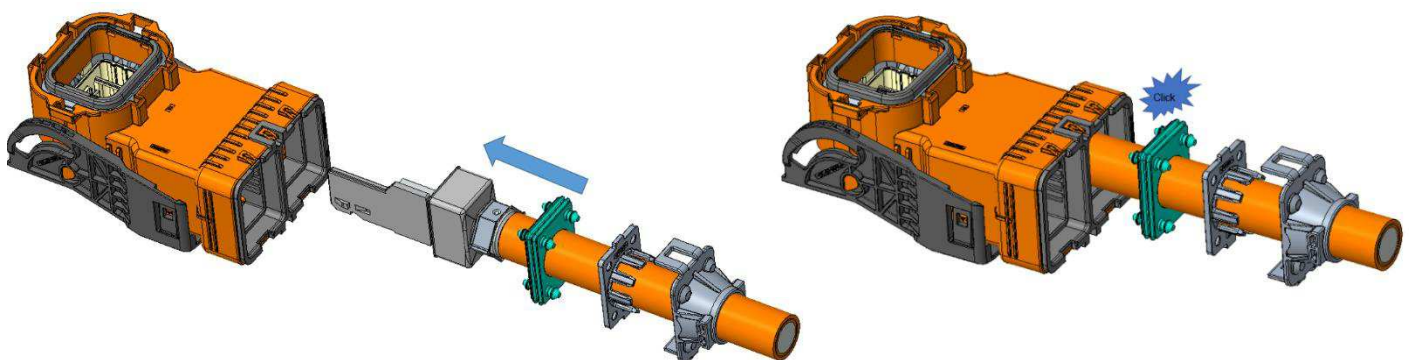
B: Plug Assembly orientation for Cable Assembly insertion.
